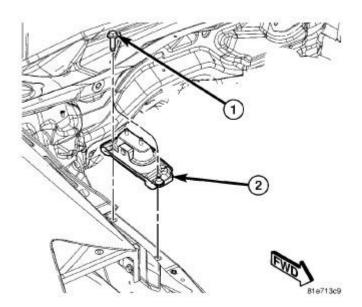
Lower Engine Mount Courtesy of CHRYSLER LLC
